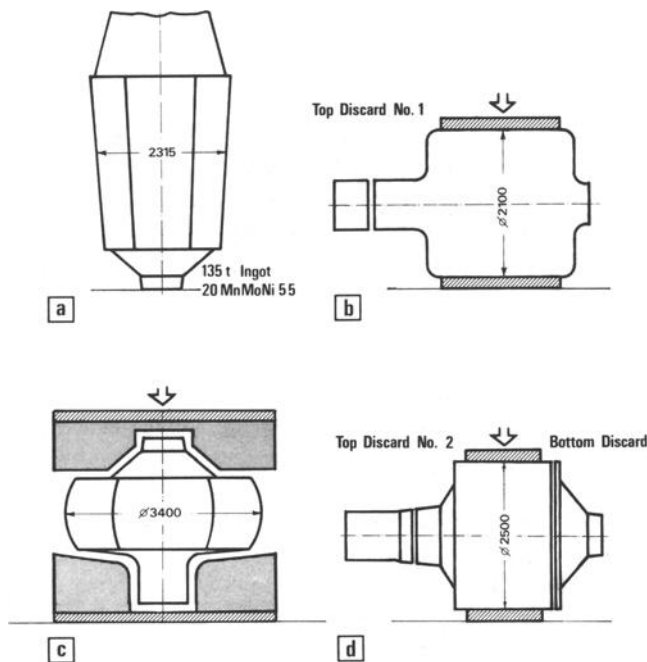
The stages of an open die forging: (a) 135-ton rough ingot; (b) forging to cylindrical shape; (c) upsetting operation; and (d) forging to shape prior to die forging.
